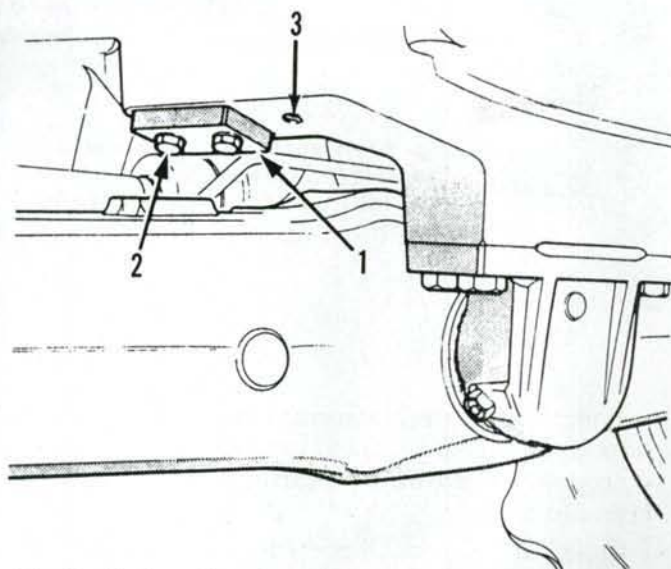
Articulation stops (1) can be installed using the center and rear (2) mounting holes as shown or the center and front (3) threaded holes can be used. Refer to text.
